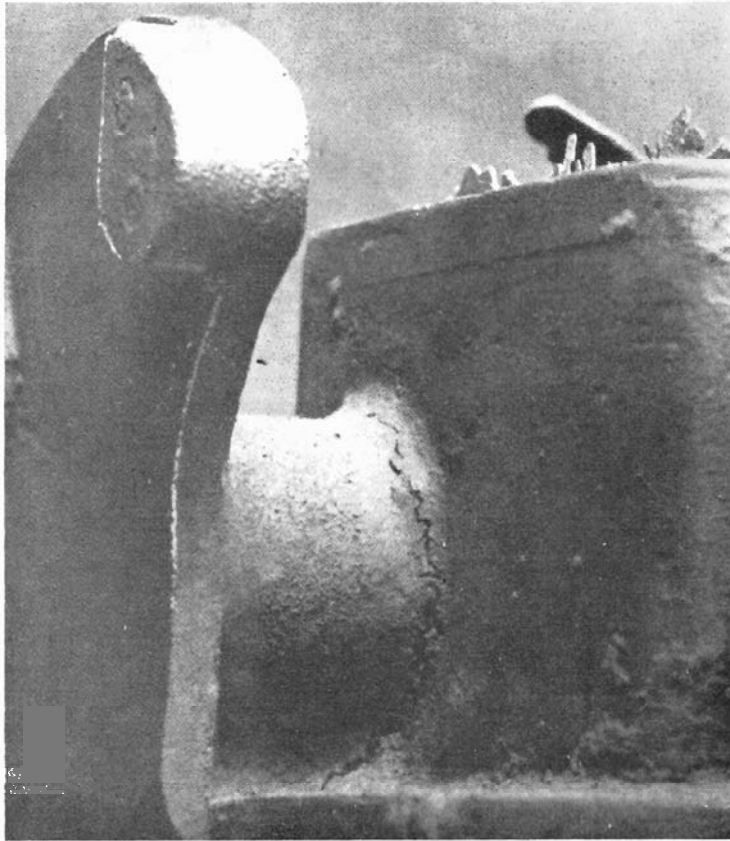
A contraction crack in the fillet of a small gunmetal sand casting.
